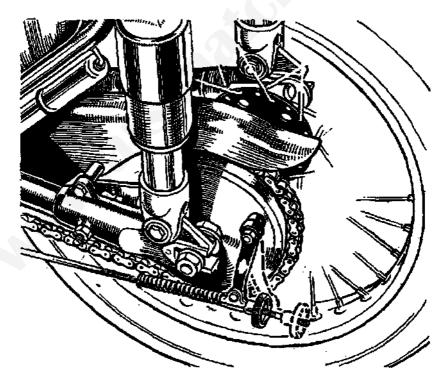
(A).-SHOWING REAR-BRAKE ADJUSTMENT EXHAUSTED
